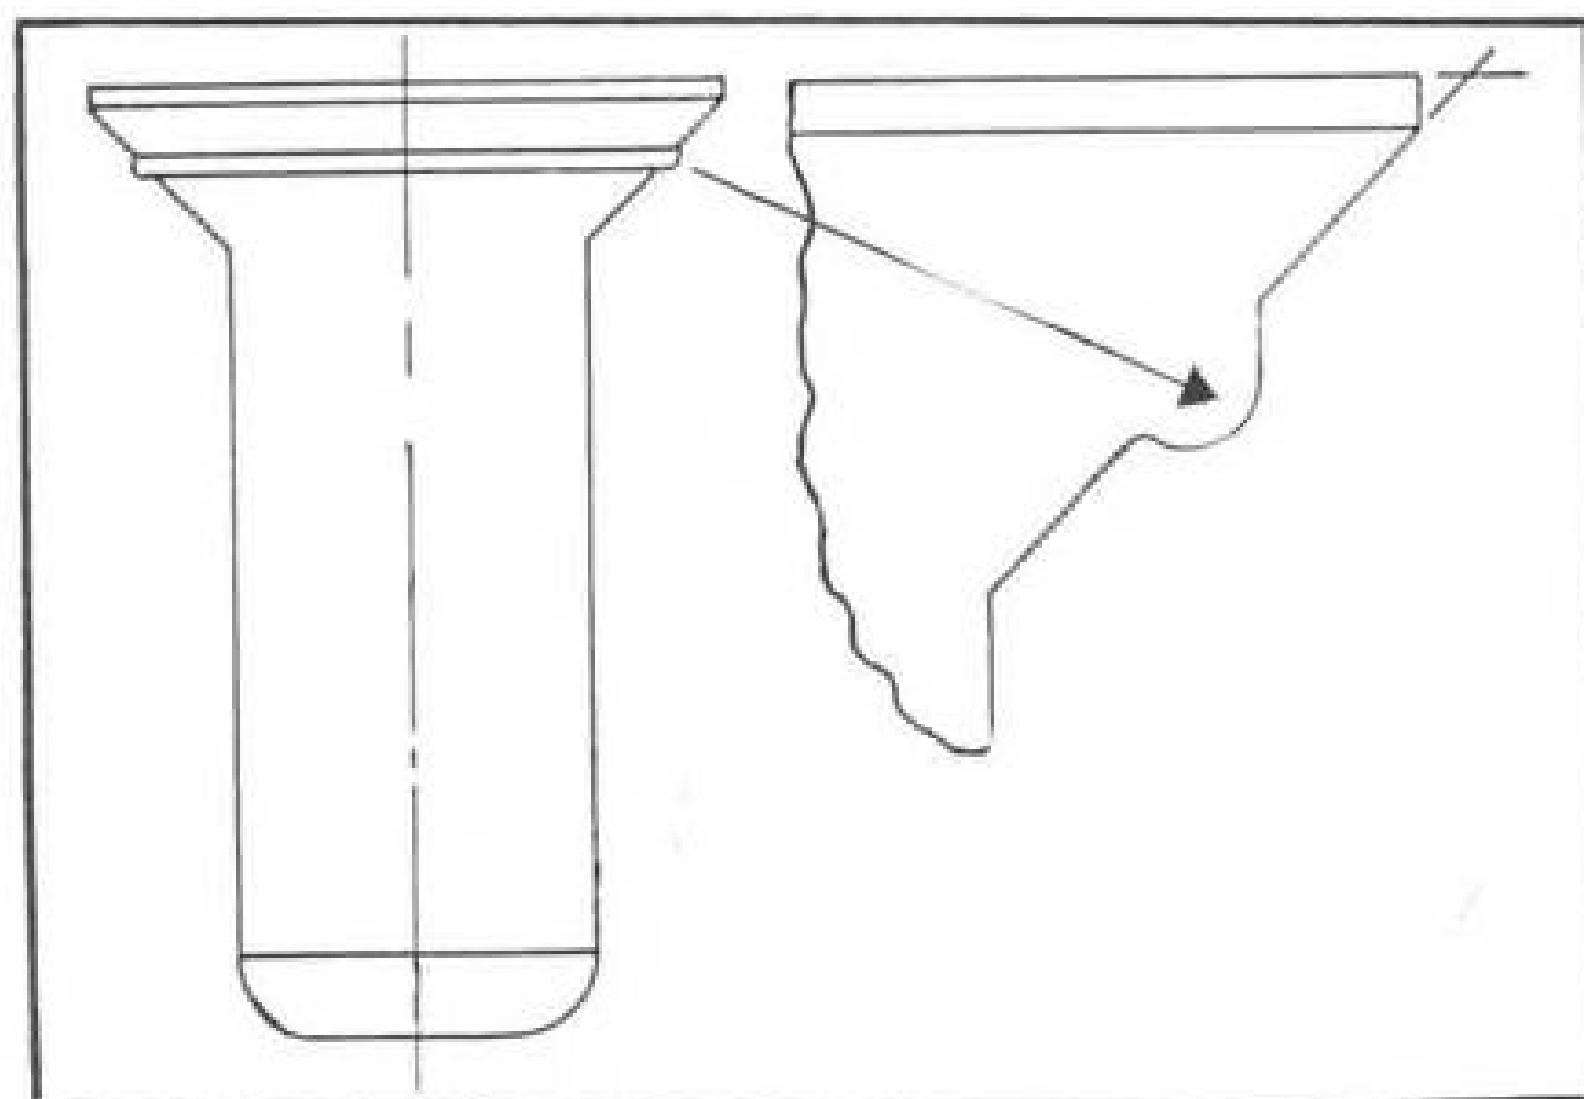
Boeing Seal Ring Rivet—a self-sealer—has bead which is flattened into surface defects of countersunk hole.
